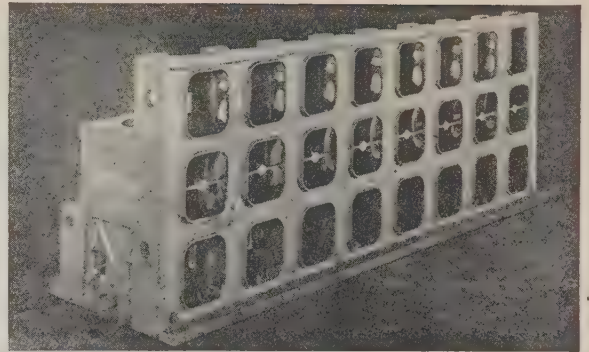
WELDMENT OF WHICH SUBASSEMBLY SHOWN IN FIG. 24 IS A PART
